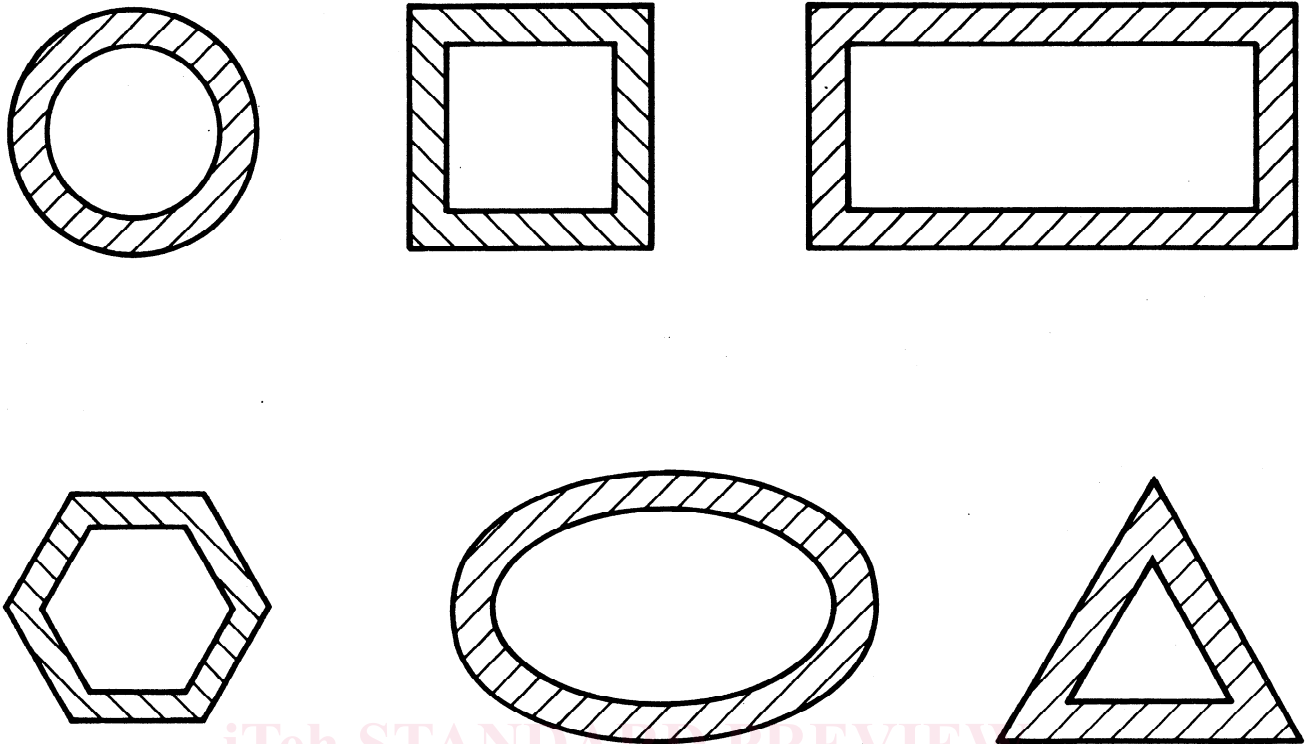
Tube cross-sections/ Figure 3 — Sections transversales des tubes/
